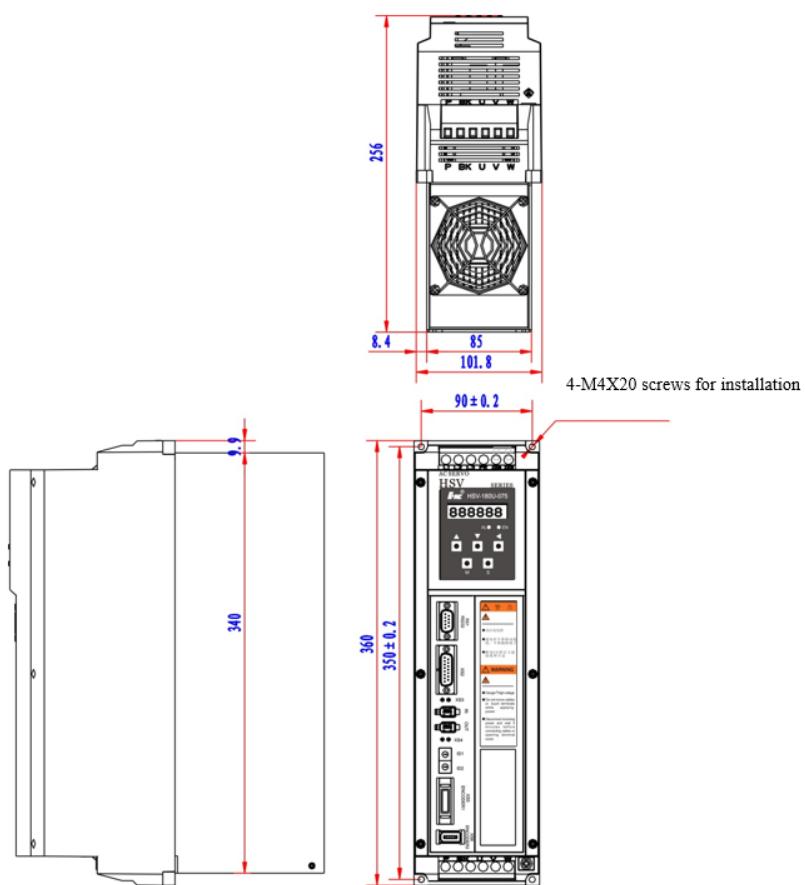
Dimensions of HSV-180US-035, 050, 075 Spindle Drivers
